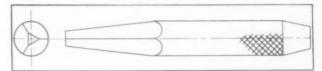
Center punches for stainless steel should not have the conventional conical point; instead, should have a triangular point flattened on the end, as shown.
